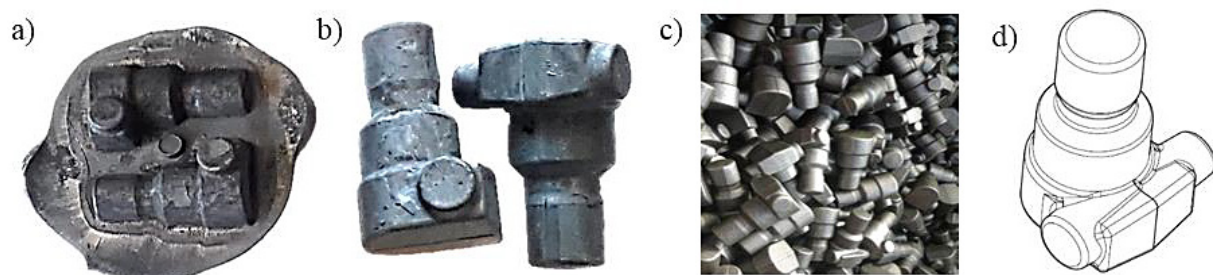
Images of: a) forgings with the flash after forging in a double system, b) ready forgings after trimming, c) after shot peening, d) a CAD model
